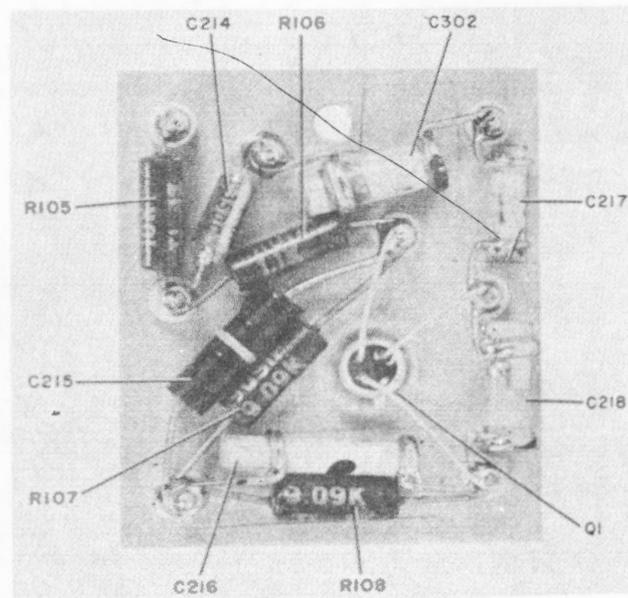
Signal Data Translator CV-1377/PRC-47 (A3), Card Assembly TB3 Parts Location
